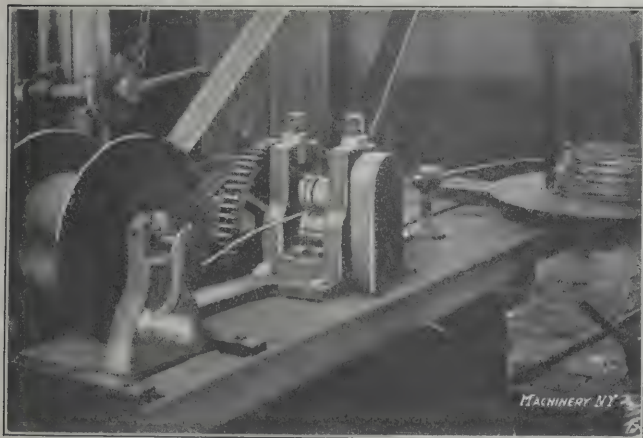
Rolls for Flattening and Sizing Copper Wire for Gaskets
